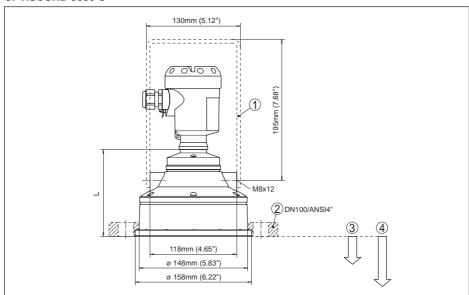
OPTISOUND 3030 C, dimension L for aluminium housing = 118 mm (4.646"), for plastic housing = 112 mm (4.409"), for stainless steel housing = 107 mm (4.213")
